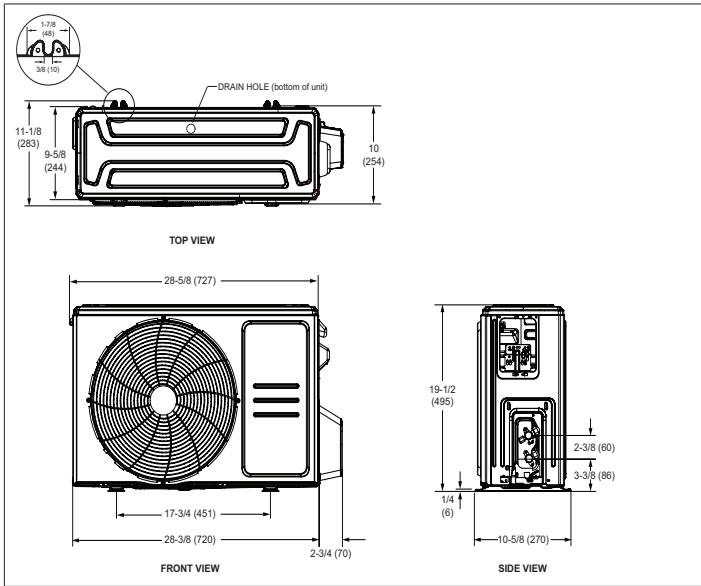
09 and 12K Outdoor Unit Dimensions - Inches (mm)
